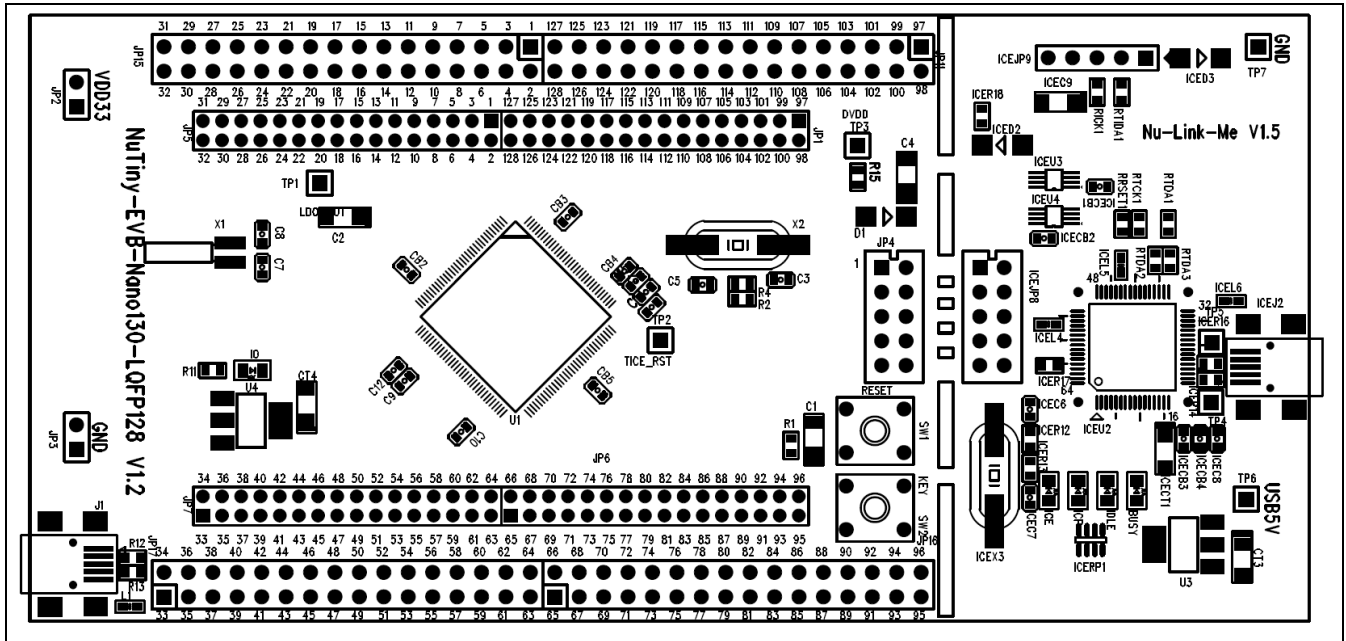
NuTiny-SDK-NANO130 PCB Placement
